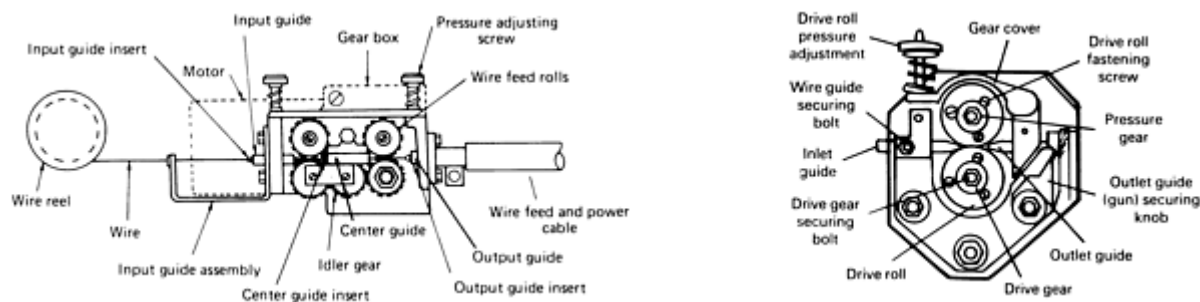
TYPICAL REMOTE-WIRE FEED UNITS. (A) SCHEMATIC OF A TYPICAL FOUR-ROLL SYSTEM MECHANISM. (B) CLOSE-UP VIEW OF A TYPICAL TWO-ROLL SYSTEM GEARBOX
